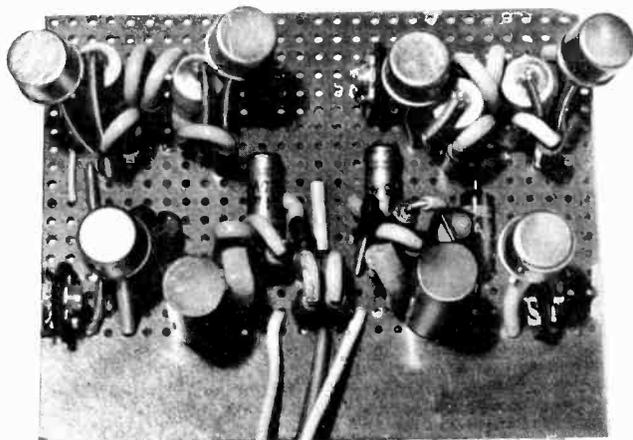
Veroboard layout of the components on 0.1 inch pitch board. In the present case this was cut from a sheet edge to give a blank area which can be drilled for fixing as required
